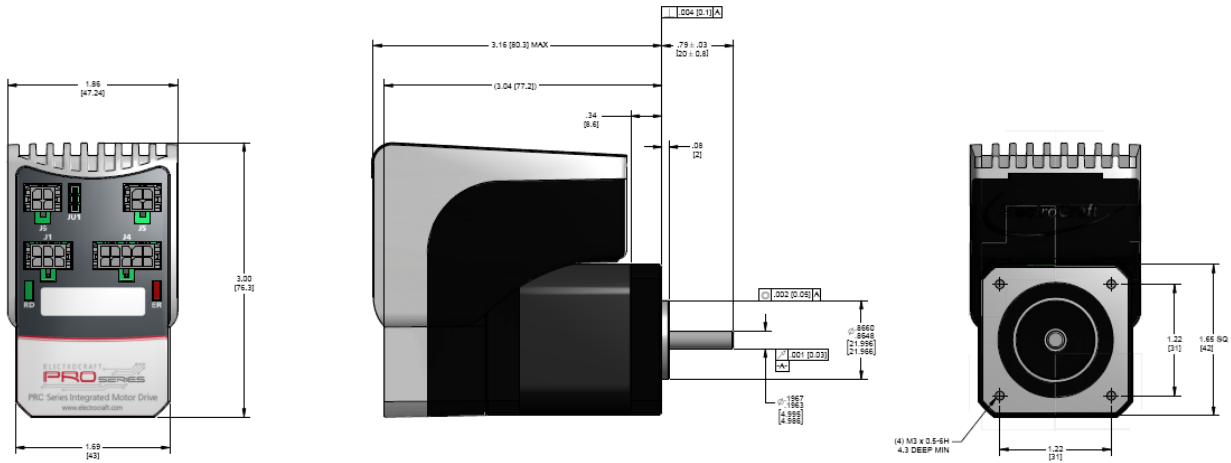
PT42-A55V48A-0-X-CAN mechanical dimensions.
